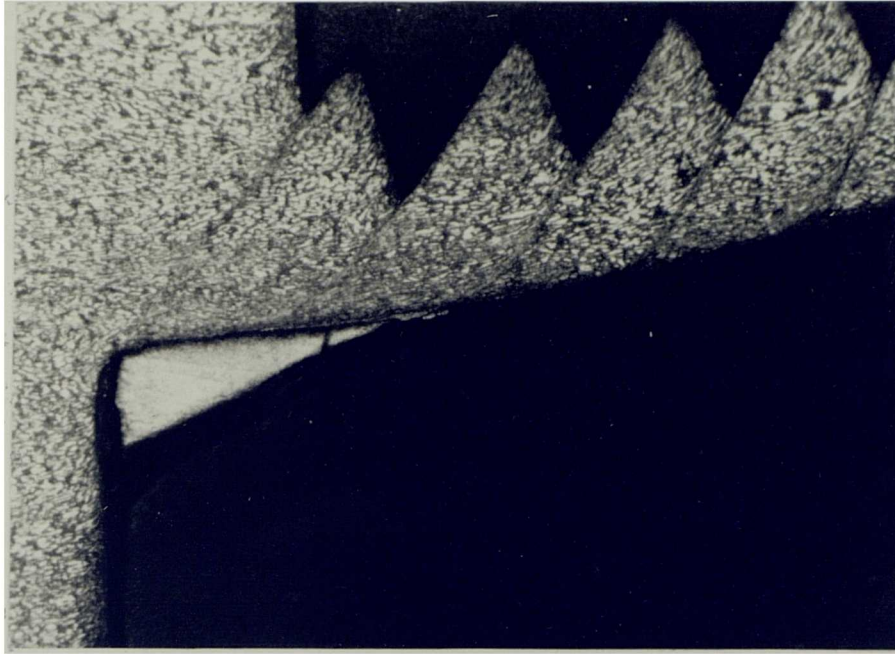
Enlarged view of (a) showing tool particles attached to the newly surface formed (400X).
